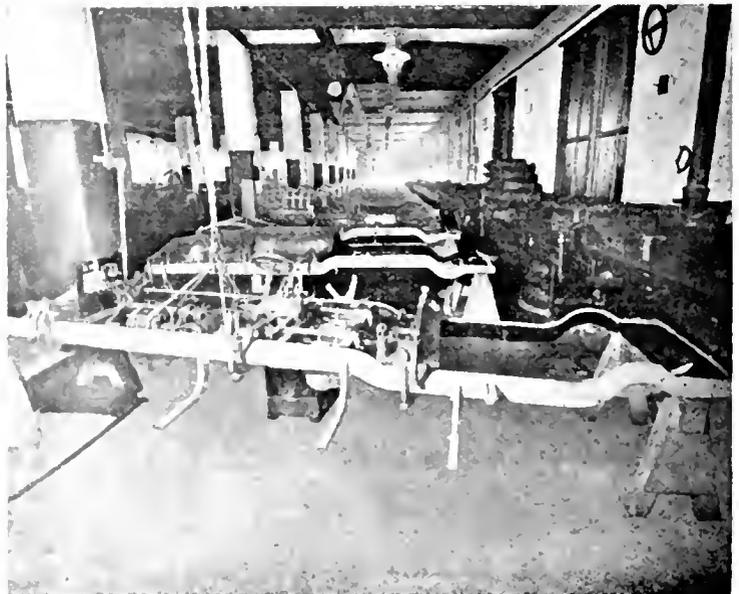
Portable Miller on Assembling Floor, Cadillac Shops
